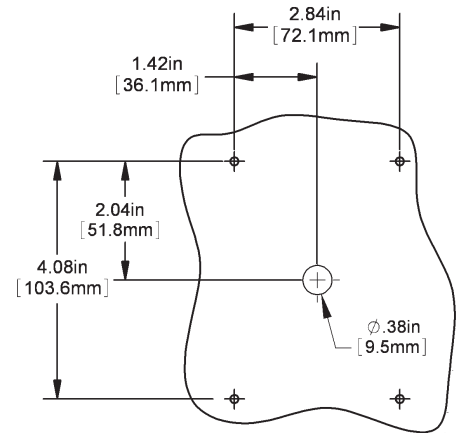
BAPI-Box enclosure mounting holes, rotate 90° for horizontal mount
